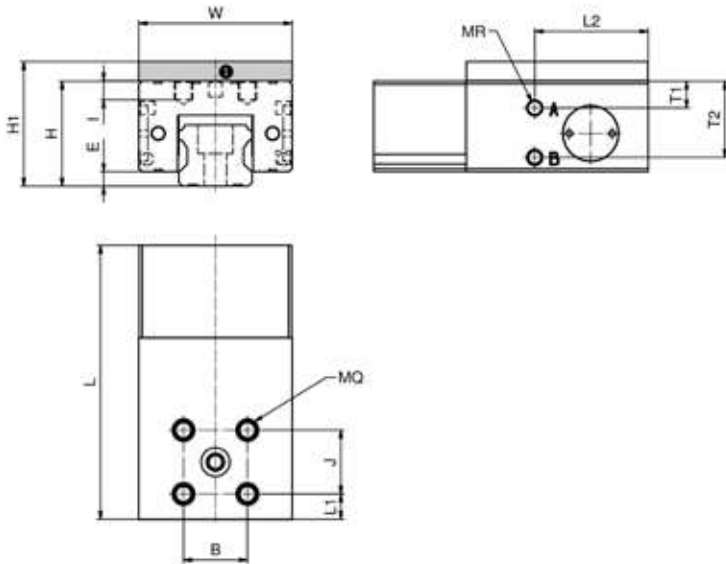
Compact passive pneumatic clamping elements for Standard Linear guides
